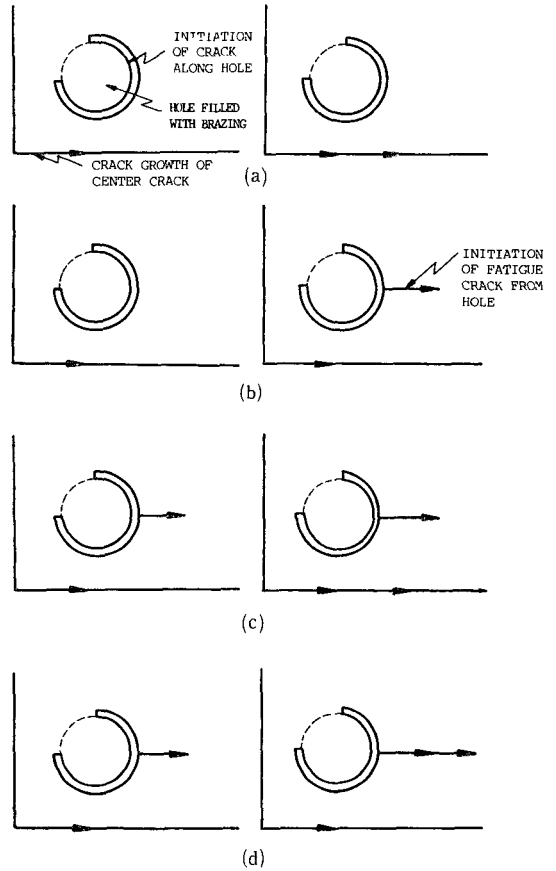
The configuration of the crack initiated from the holes filled with brazing
